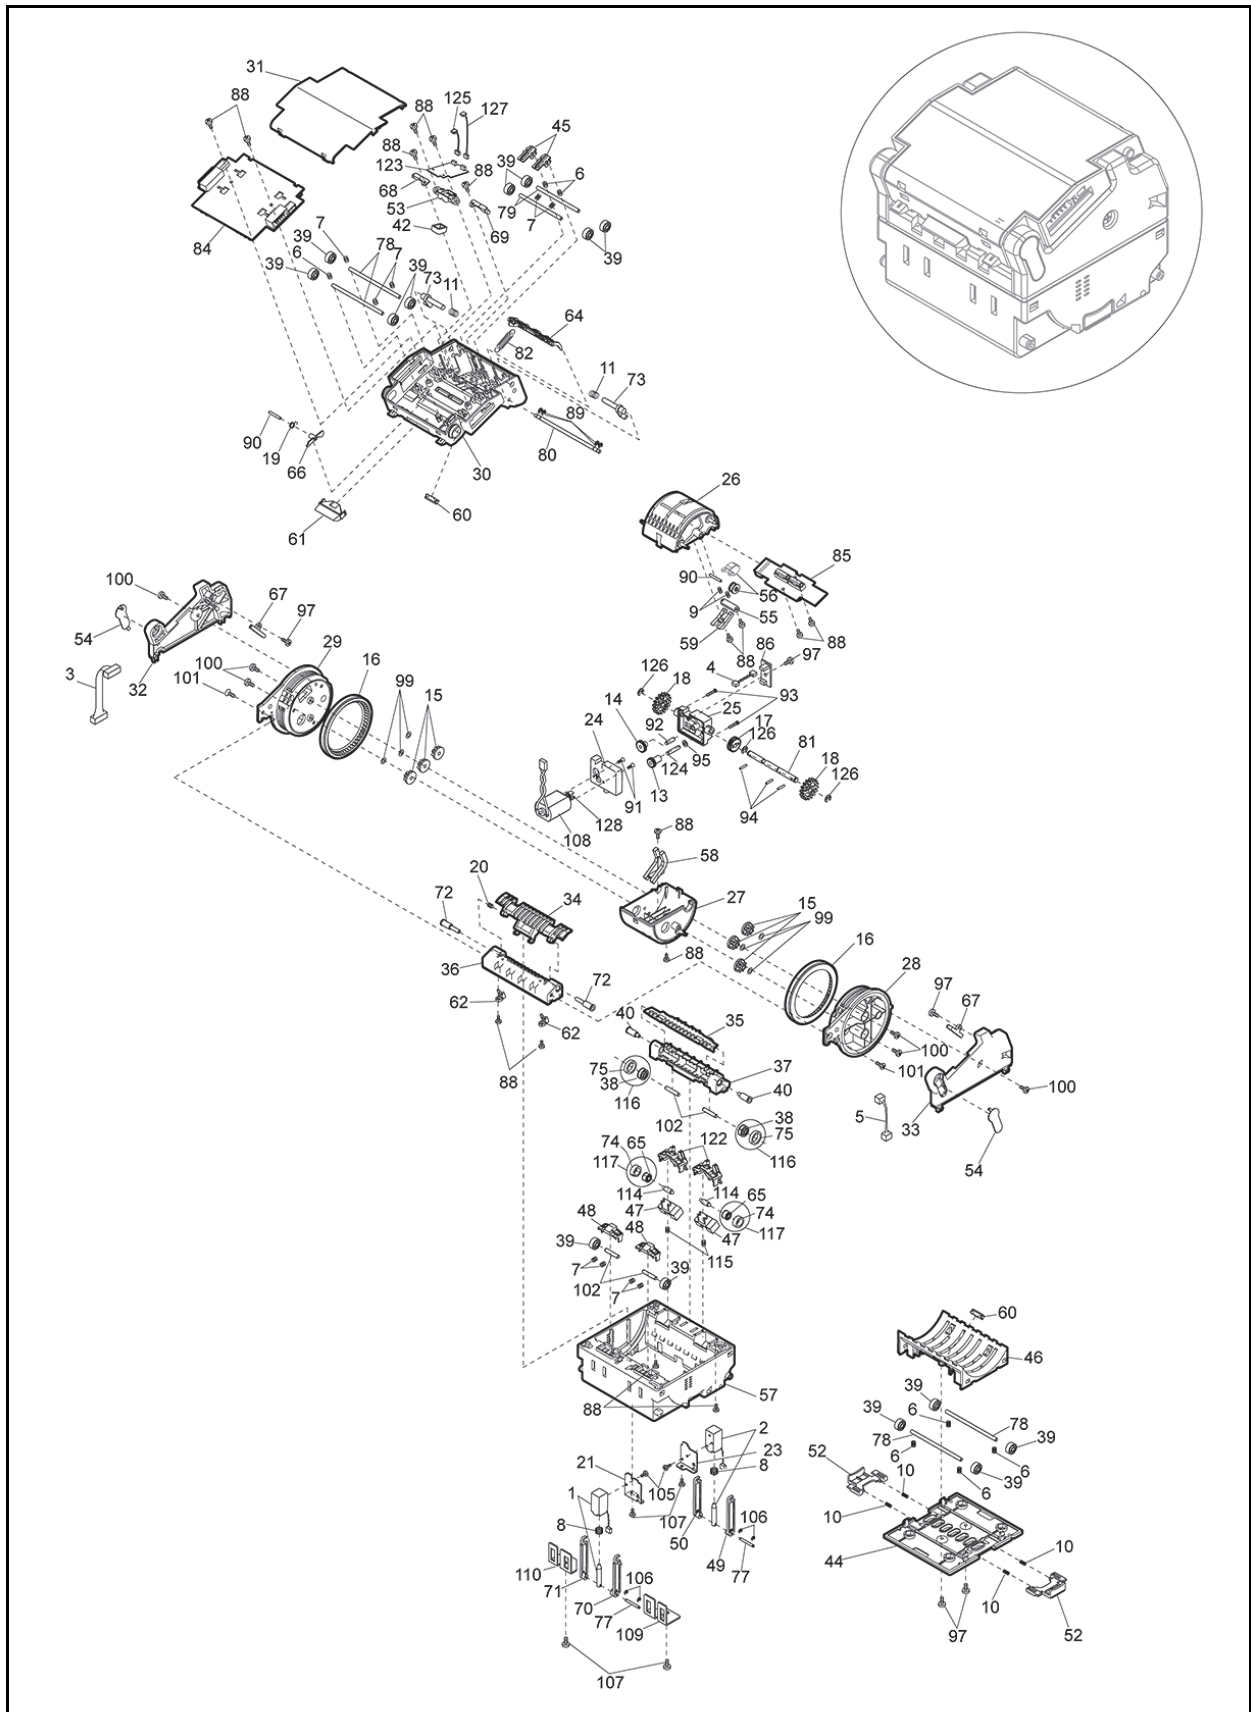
Complete Taiko PUB-7/11 Unit Exploded View
